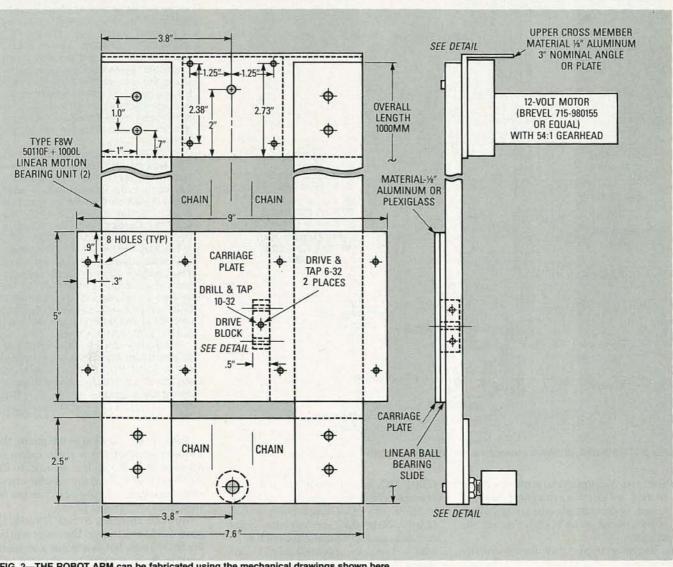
THE ROBOT ARM can be fabricated using the mechanical drawings shown here.
